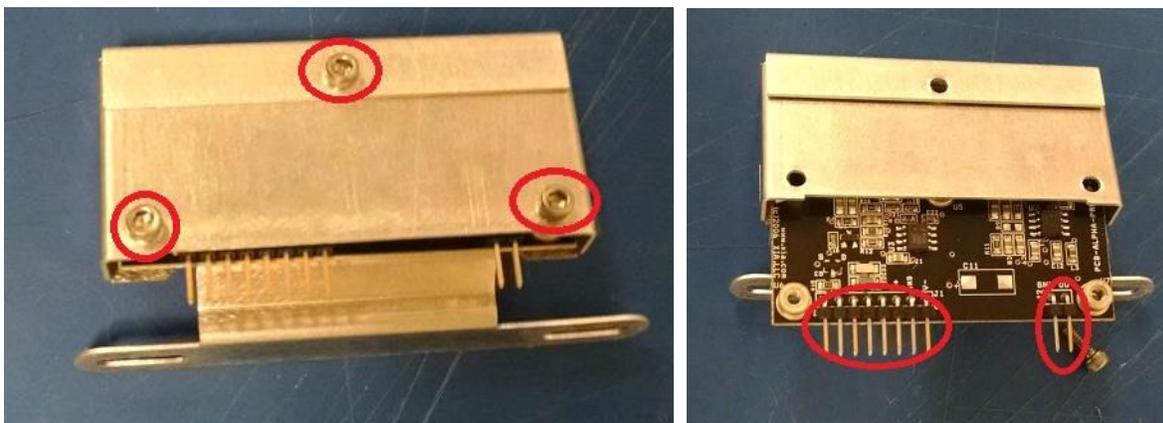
Left: screws to remove to take preamplifier PCB out of housing. Right: Do not touch the sensitive signal nodes circled in red.
